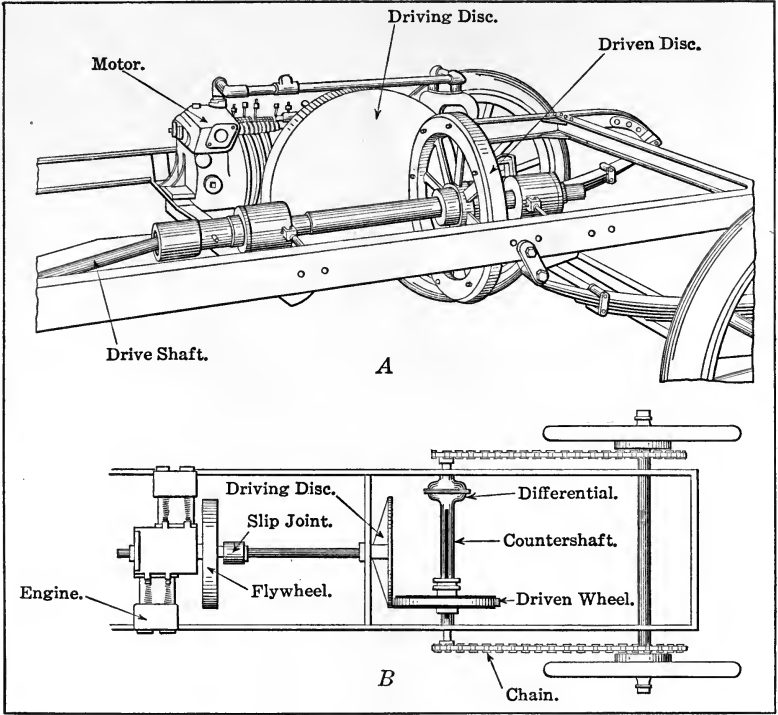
How Face Friction Gearing is Installed in Motor-Car Chassis. A—Arranged for Shaft Drive. B—Power Transmitted to Wheels by Side Chains.
